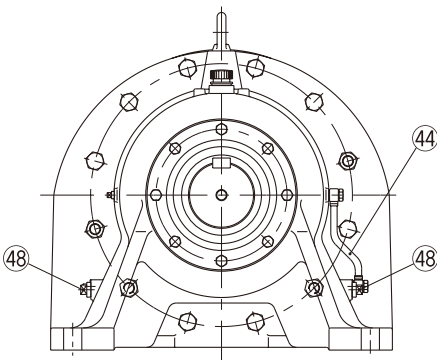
Type CHHM (Horizontal, Gearmotor) Single reduction
